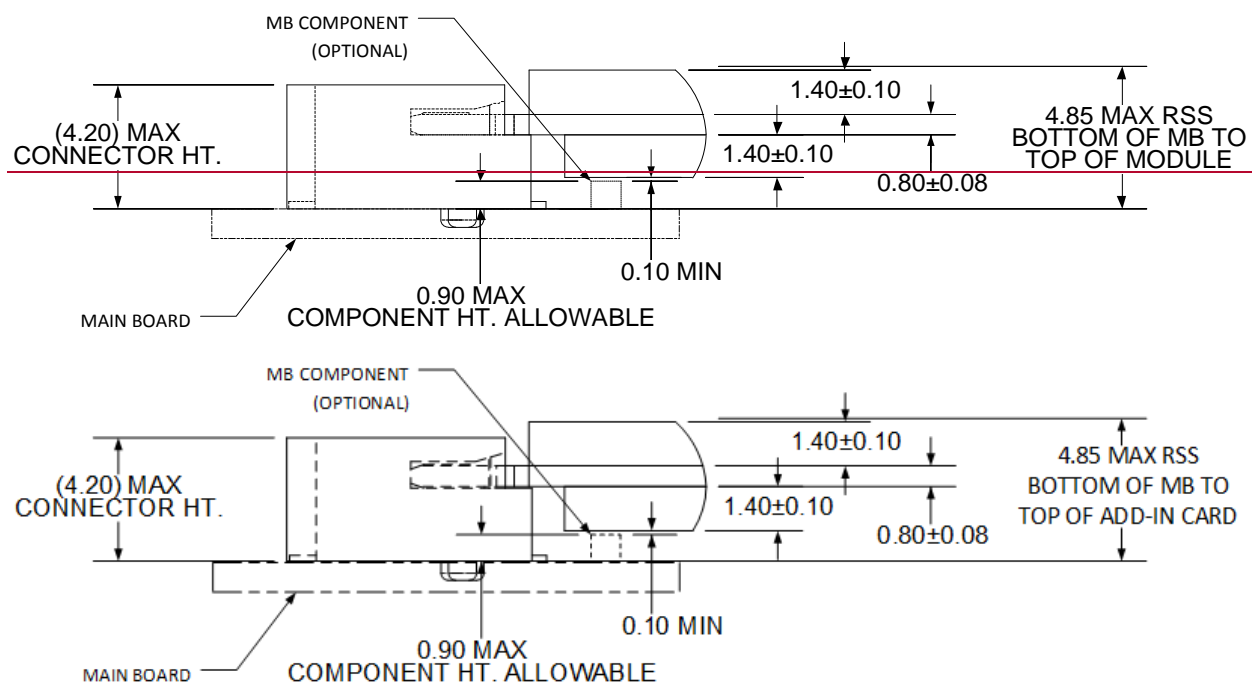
H4.2-D5 - Stack-up Top Mount Double-sided Add-in Card for 1.5 Maximum Top-side Component Height with 1.5 Maximum Bottom-side Component Height
